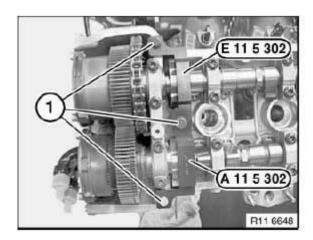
Identifying Special Tools A 11 5 302 And E 11 5 302 Courtesy of BMW OF NORTH AMERICA, INC.
